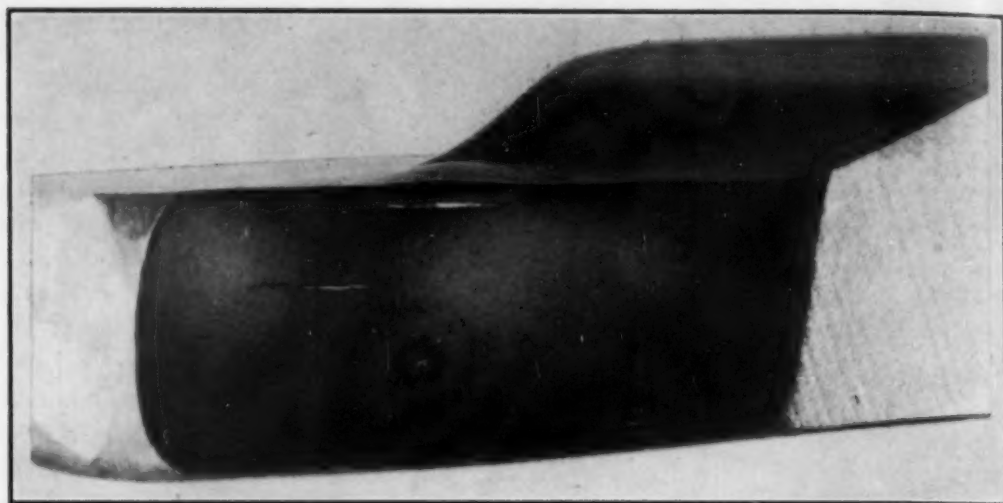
Photomicrograph of Milling Cutter Blank Showing Surface Cracks. $\times 2$.
